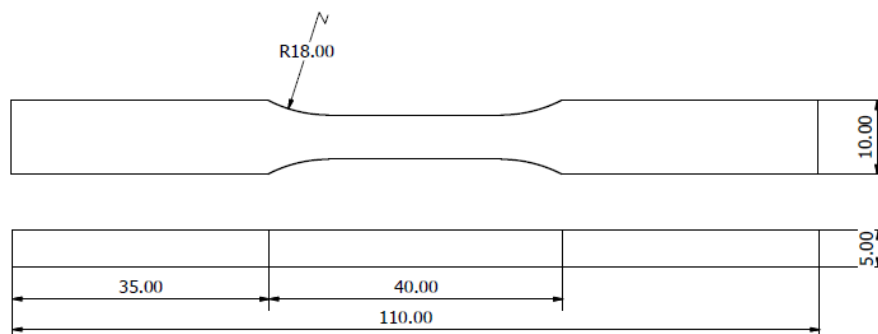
Drawing of the tensile sample (all dimensions are in mm)
